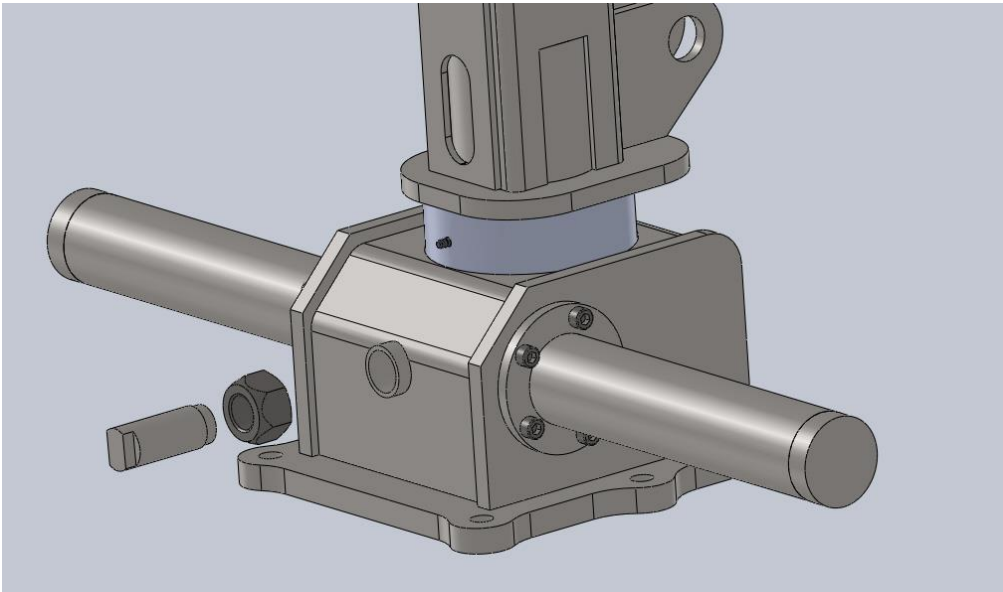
Forest crane Country 480 adjusting racks of slewing device
